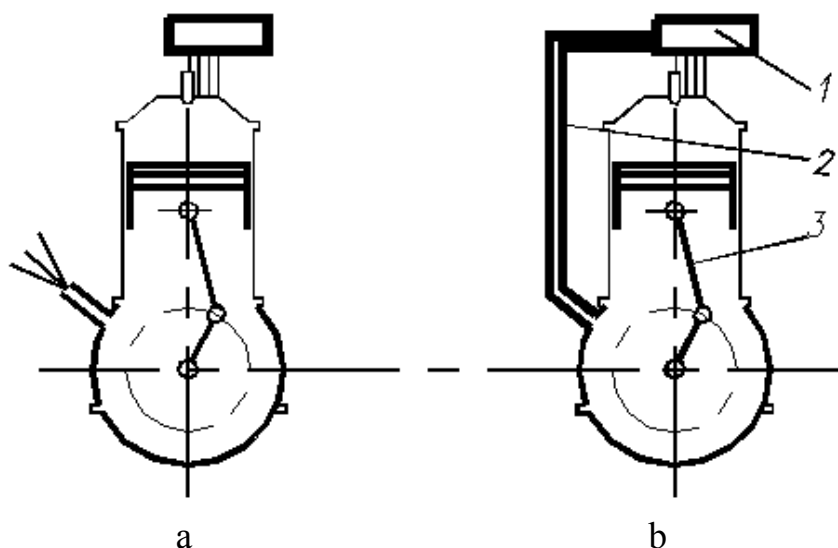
Open normal (a) and closed positive (b) ventilation system:
